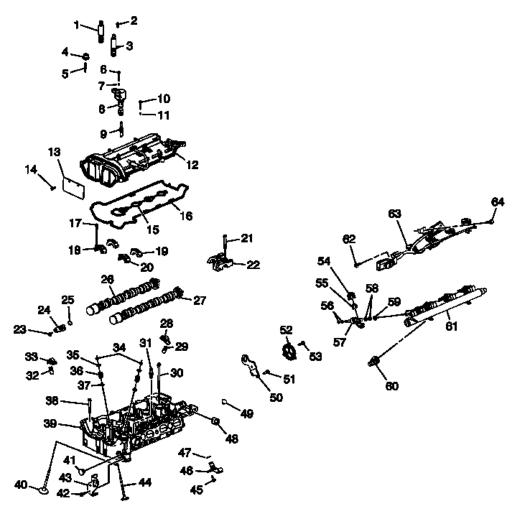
Exploded View Of Cylinder Head And Components Courtesy of GENERAL MOTORS COMPANY
